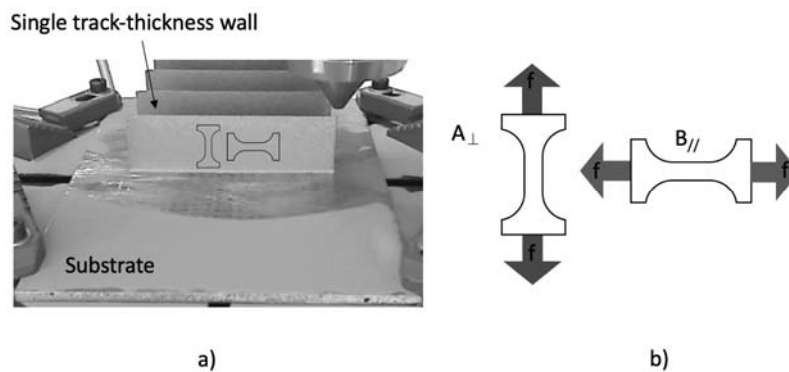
Single track thickness walls and the extracted specimen: a) positioning of the specimens in the machine with a vertical building direction and horizontal back and forth printing direction, and b) loading directions of the two specimen types.
